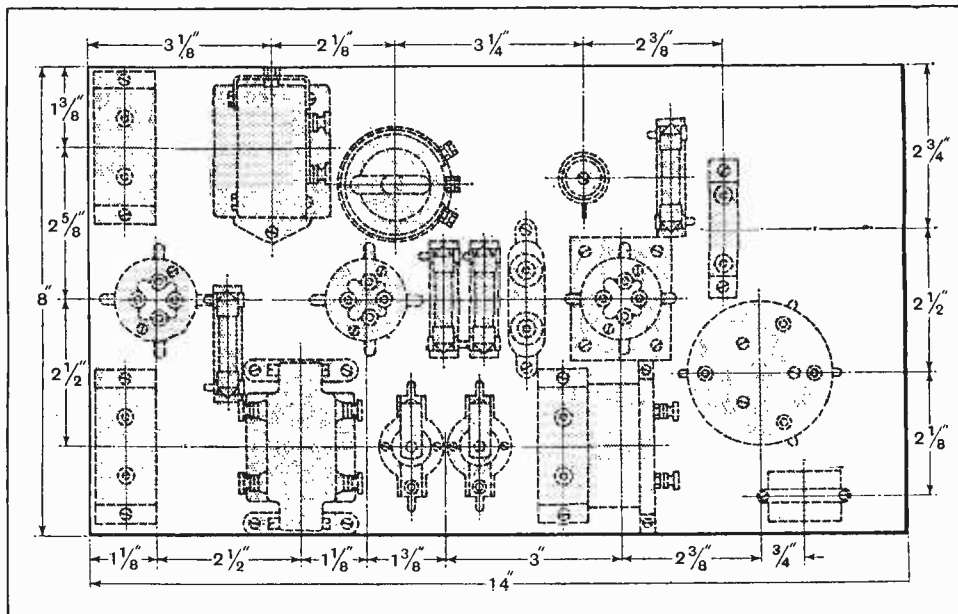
Position of components on the baseboard. Note sponge rubber support of detector valve holder.
